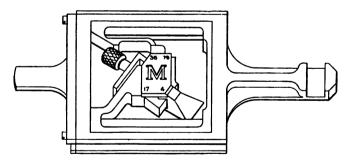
Monotype casting machine ; large-work matrix-holder for sorts-casting.
